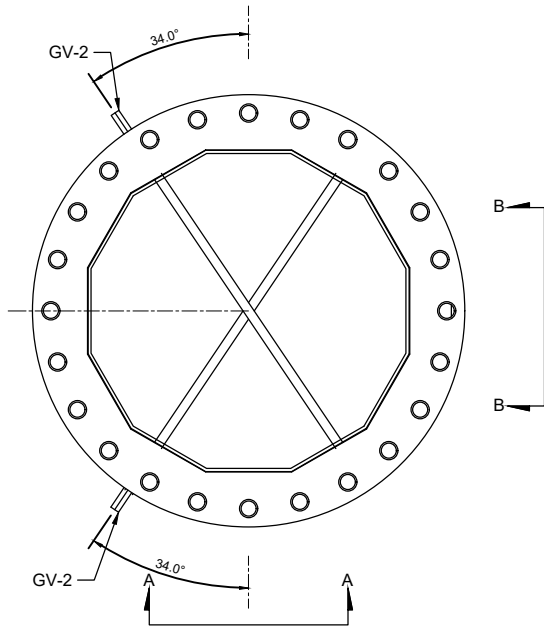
DETAIL C - TYPE-C CONDUCTOR ATTACHMENT PLATES DETAIL
